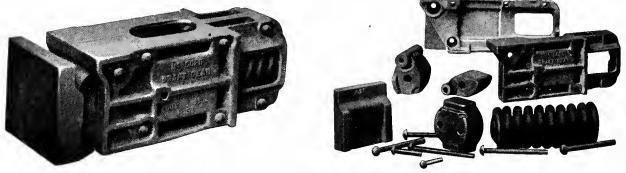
McCord Draft Gear, Type D. McCord & Company.
